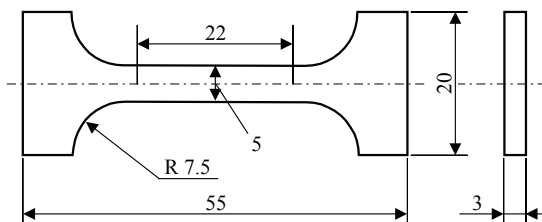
Dimensions of the plate specimen used for tensile testing.
